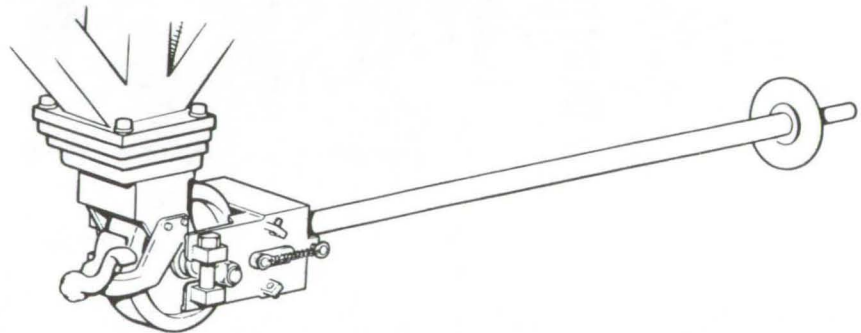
Positioner Mounted on Castor Wheel: a U-shaped frame has slots to fit around the axle of the wheel.
